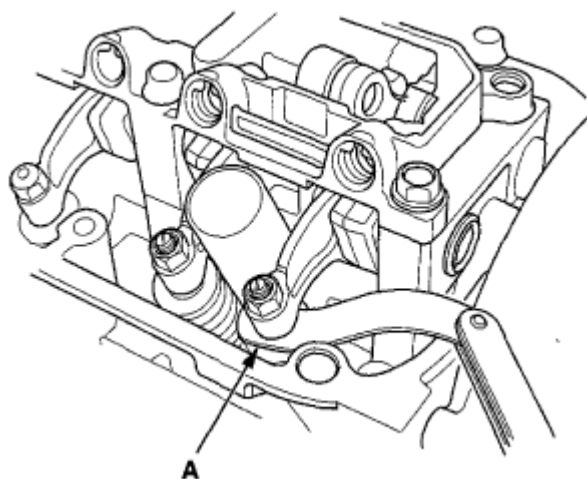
Inserting Feeler Gauge Between Adjusting Screw And End Of Valve Stem On No. 1 Cylinder (EXHAUST)
